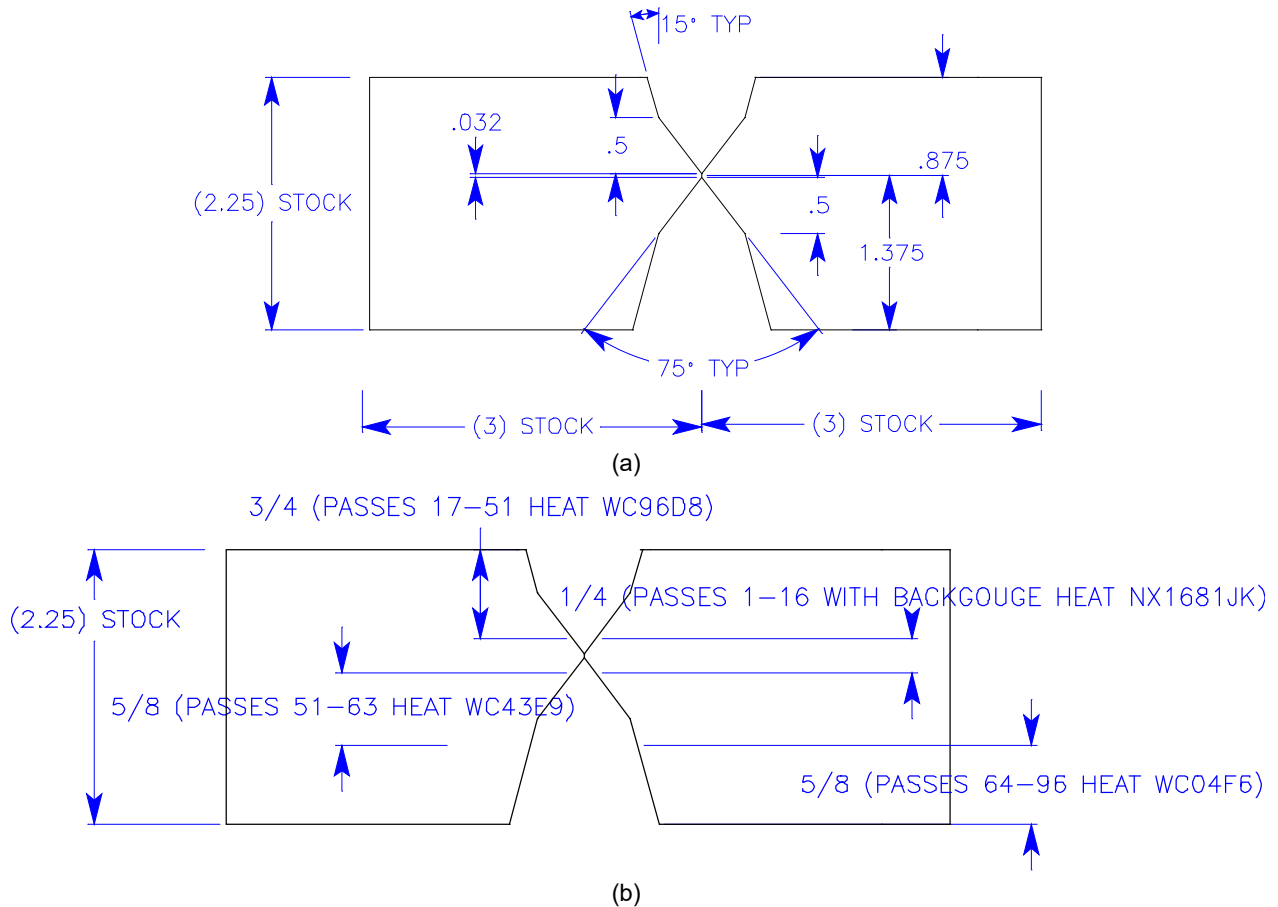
(a) Schematic of the weld joint design for the Alloy 152 double-J weld, and (b) weld passes and filler heats used.
